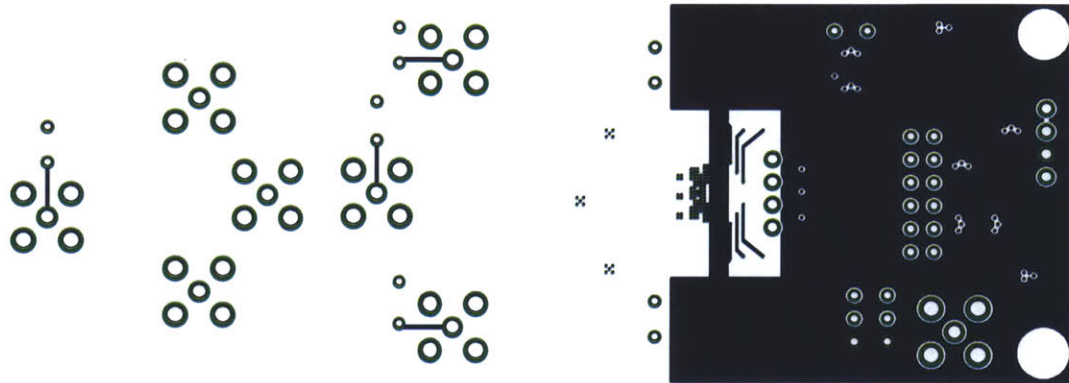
The Layer 2 PCB Layout of the Ac Power Delivery 3 Individual Full-bridge IC PCB Prototype.
